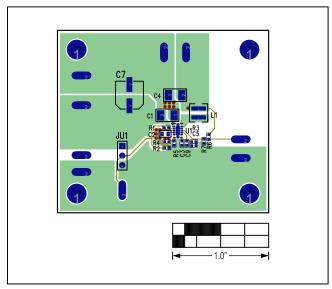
MAX17542G 3.3V Output EV Kit PCB Layout—Component Side
